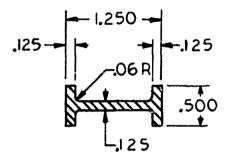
Cross section of legs and struts for A-1 and F-1 structural mock-up models.
